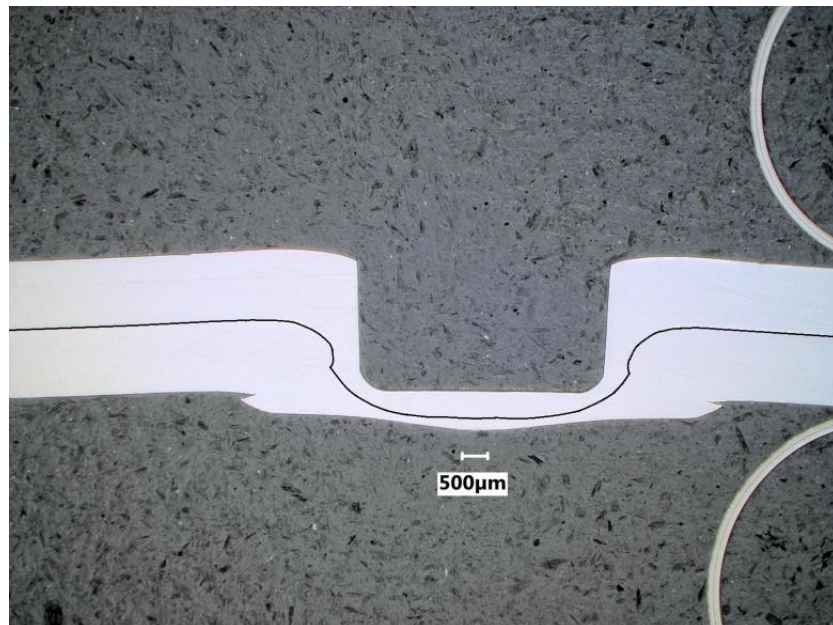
Cross-section through the clinched joint from solution heat-treated sheet, forming force of 40 kN, blank holder type C.
